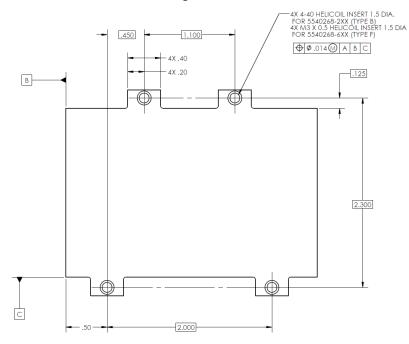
Radial Pins and Threaded Tabs Package Bottom View
